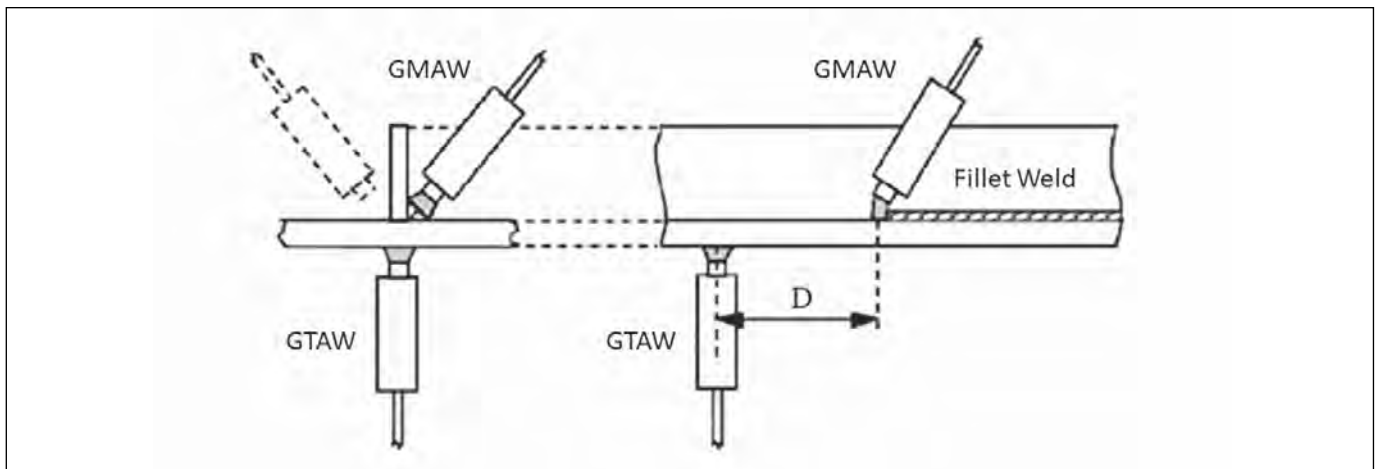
Schematic illustration of welding distortion control by reverse-side heating.
